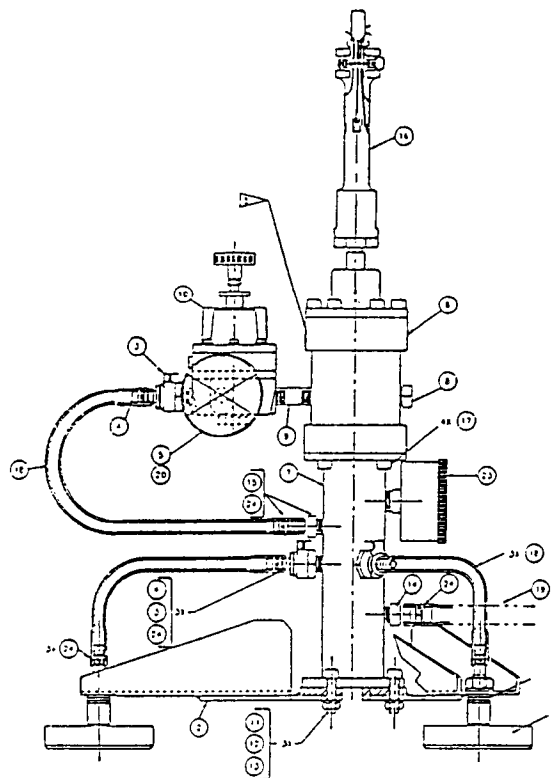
Typical Air Pad and Air Active Suspension Assembly
